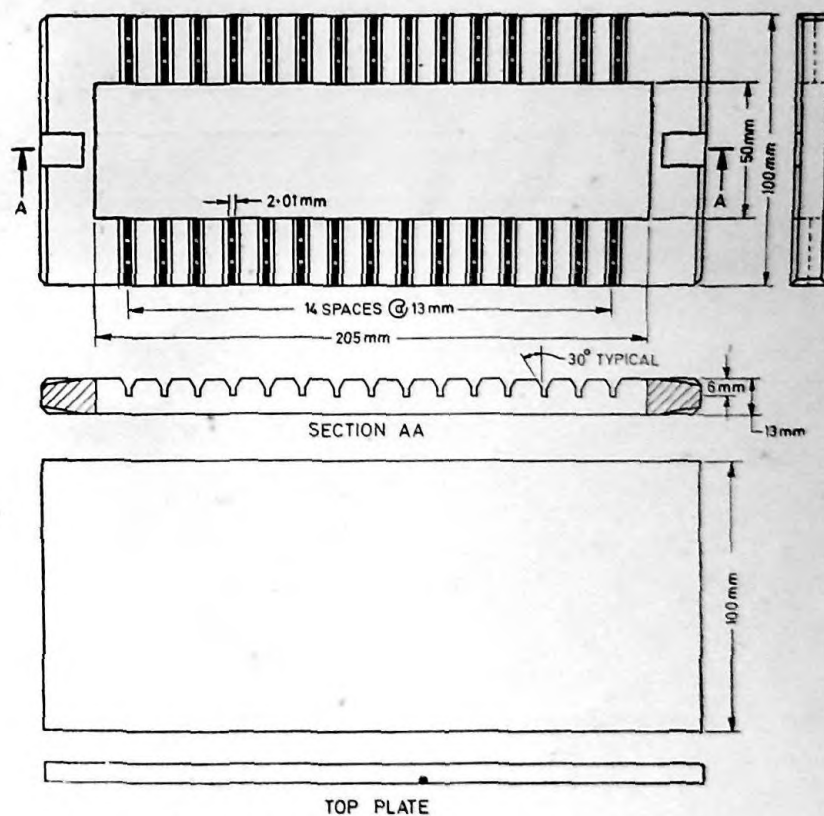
MOULD WITH TOP AND BOTTOM PLATES
